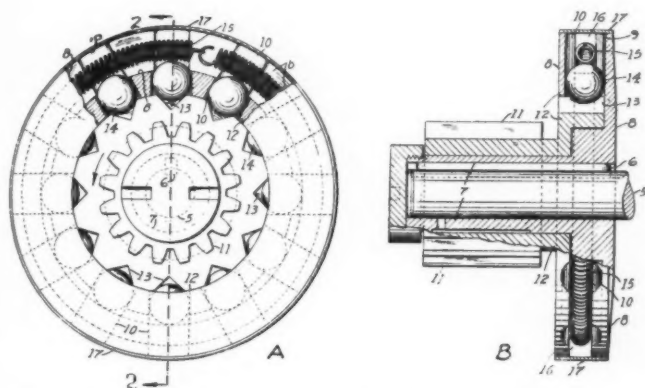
A—End elevation of slip coupling showing clutch elements. B is a cutaway side view
